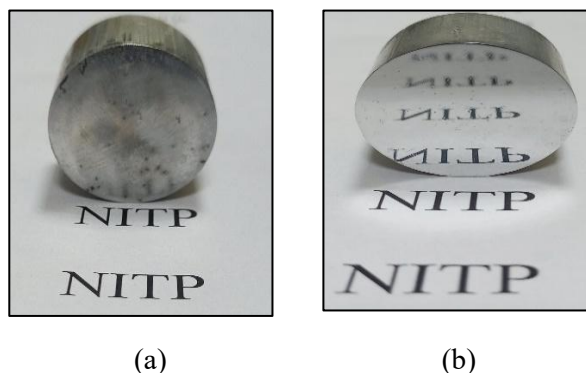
Text image on workpiece surface (a) Before finishing (b) After finishing
